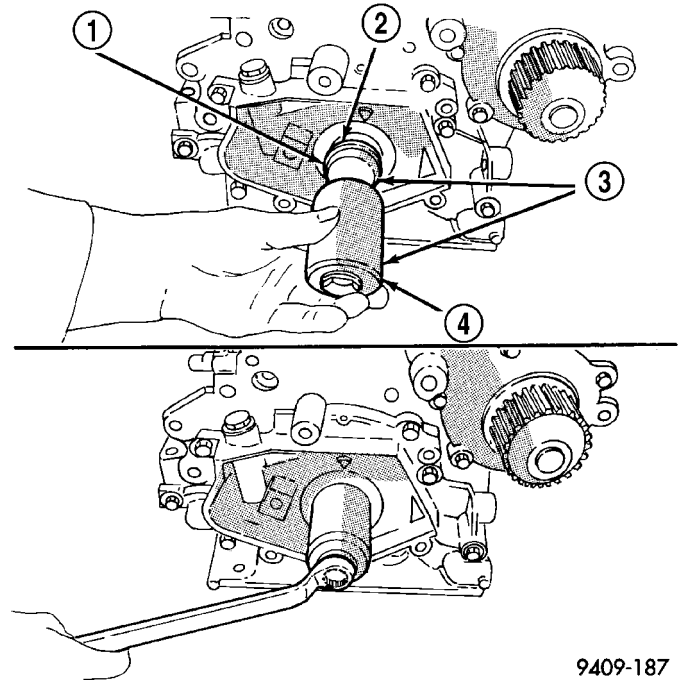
Front Crankshaft Oil Seal—Removal
